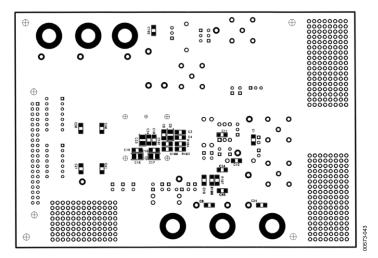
Evaluation Board Solder Side Assembly (Not to Scale)
